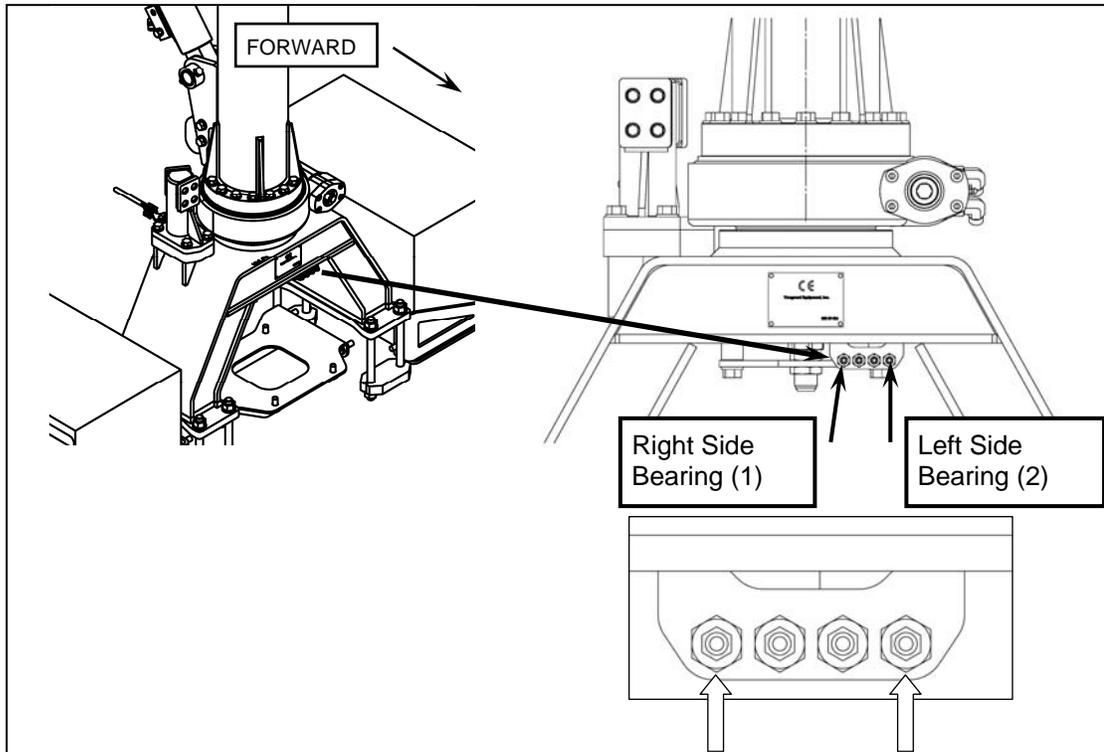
Slewing Drive Bearing lubrication Left and Right side location
